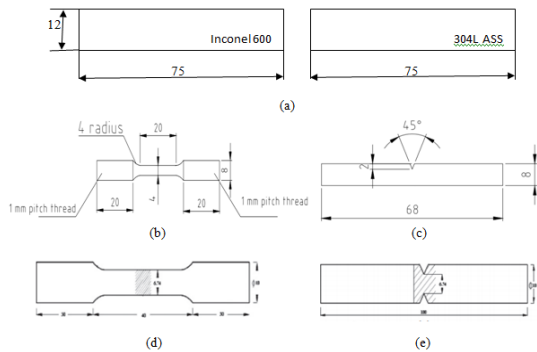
Dimensions of the specimens. (a) Dimensions of the base materials before welding.(b) Dimensions of the Unnotched hot tensile specimen. (c) Dimensions of Notched hot tensile specimen. (d) Dimensions of unnotched tensile specimen. (e) Dimensions of notched tensile specimen.
